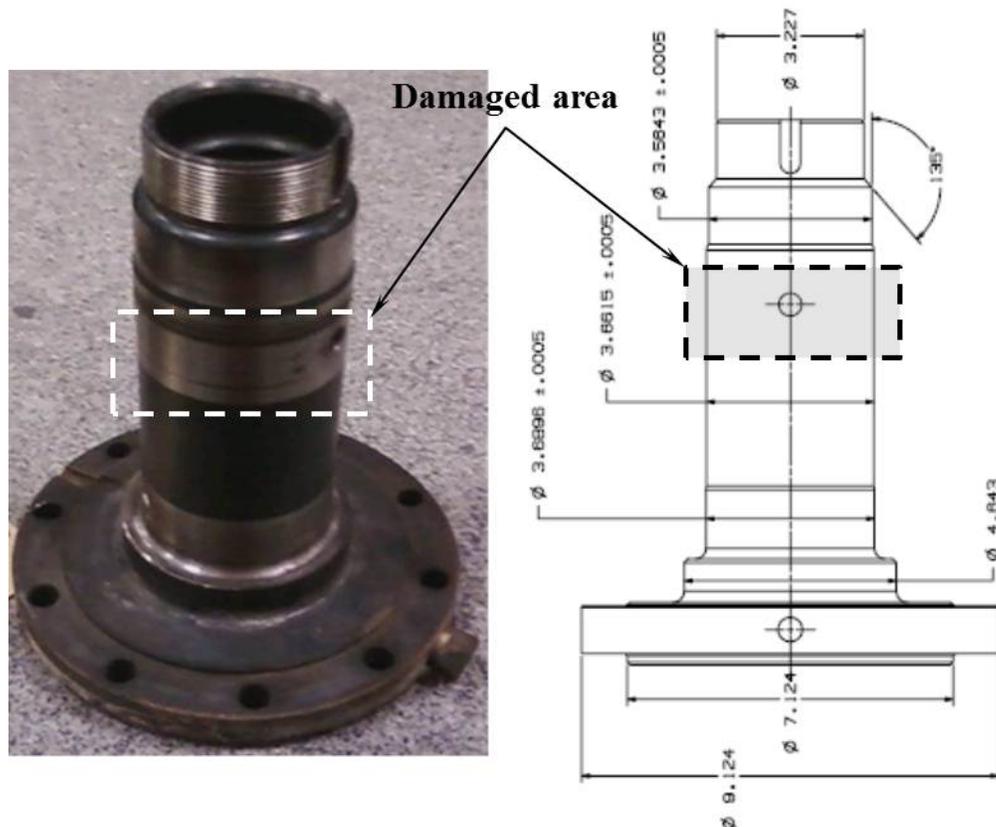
Photo and design print of corrosion-damaged CTIS truck spindle
